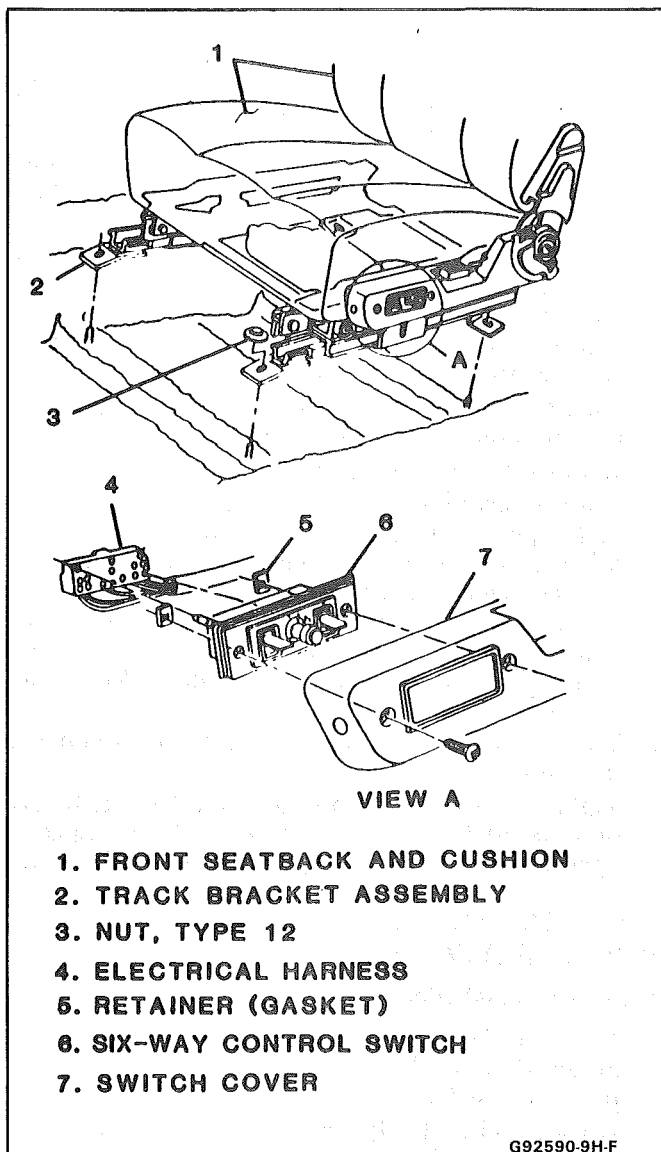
Seat to Floor Pan and Six-Way Power Seat Control Switch Installation
